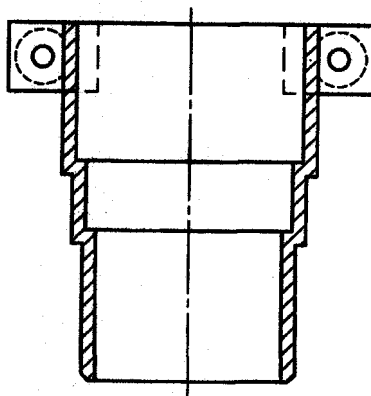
Typical pipe coupler with fixing lugs and outlet spigot sleeve
